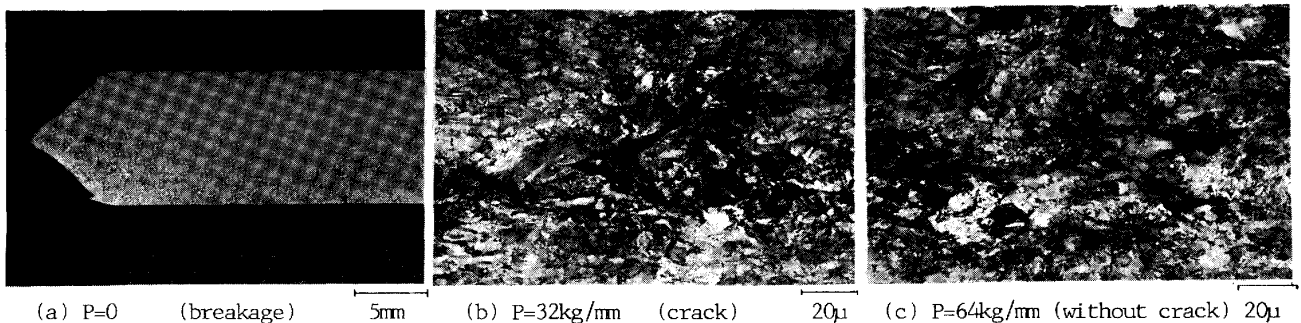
AN EXAMPLE OF PREVENTION OF CHEVRON CRACK (STEEL B)
